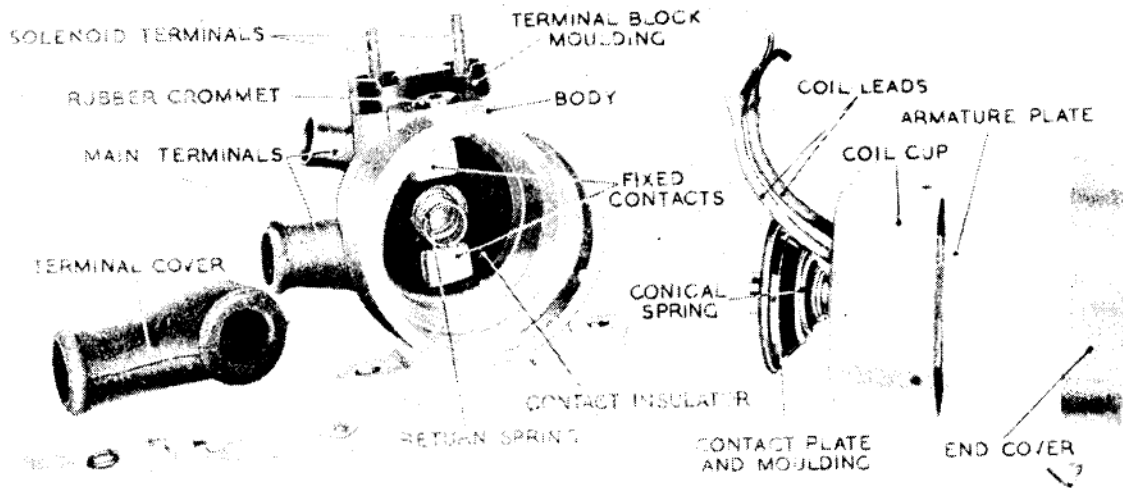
Rotax solenoid switch, Type D.0213, partly dismantled
